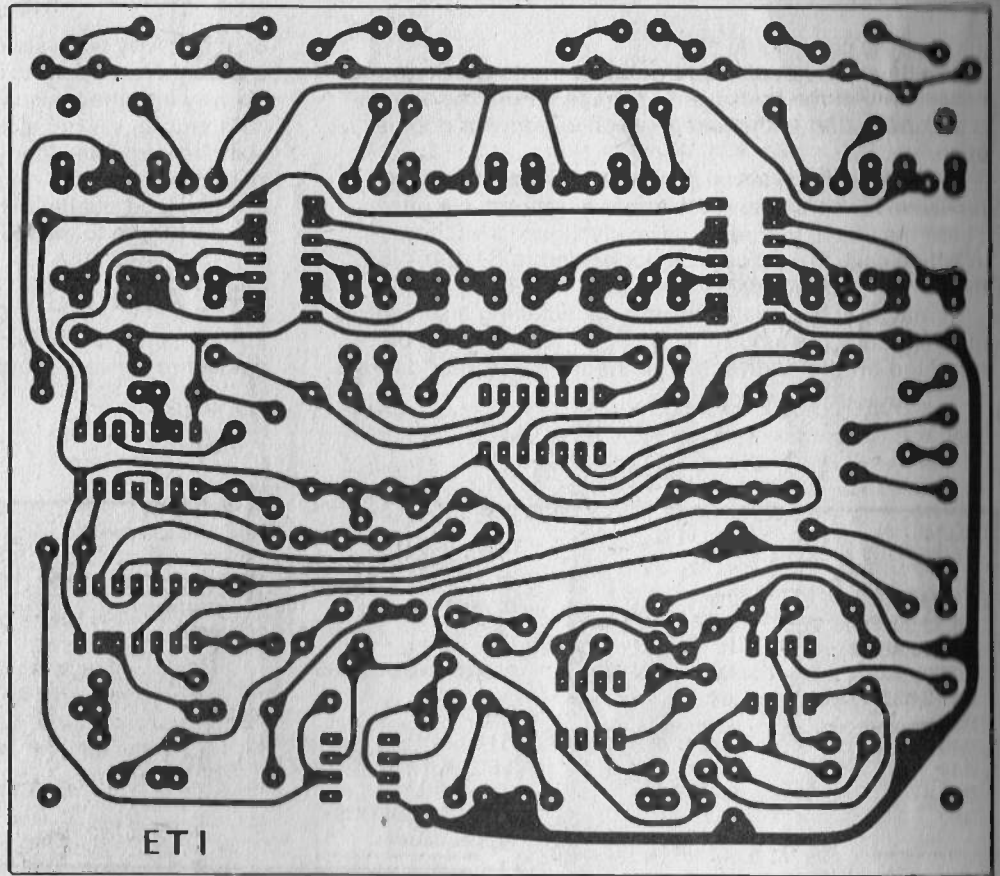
PCB foil pattern of 'A' board shown full size (130 x 115mm).
